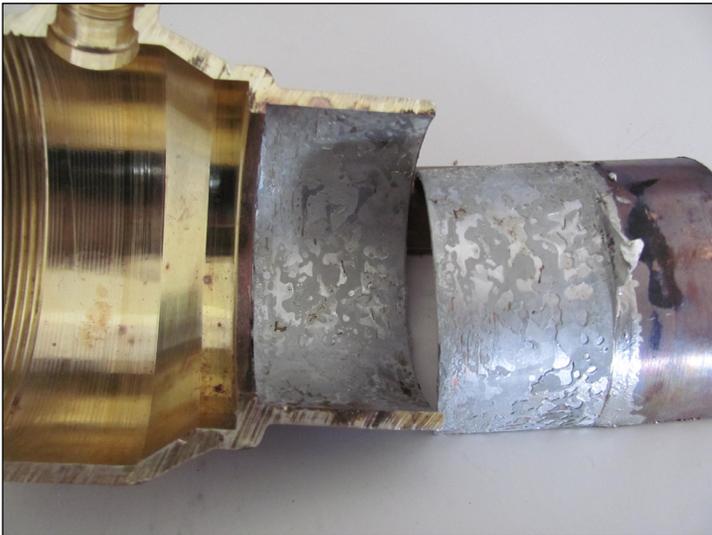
Properly Completed Solder Joint – Prepared identically to Figure 1. Brush marks from mechanical cleaning (stainless steel fitting brush inserted in power drill) no longer evident as proper heating allowed for complete solder flow and fill in the capillary space.
